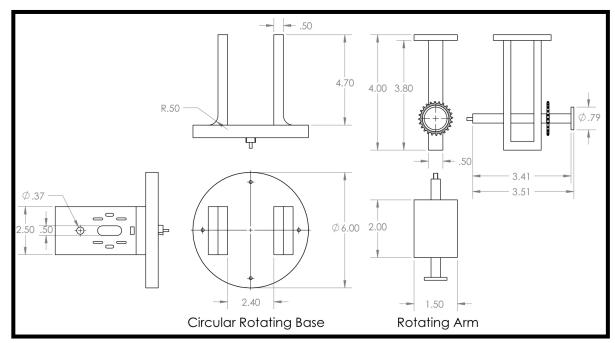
Mechanical drawing of the collector components. All measurements are in inches.
